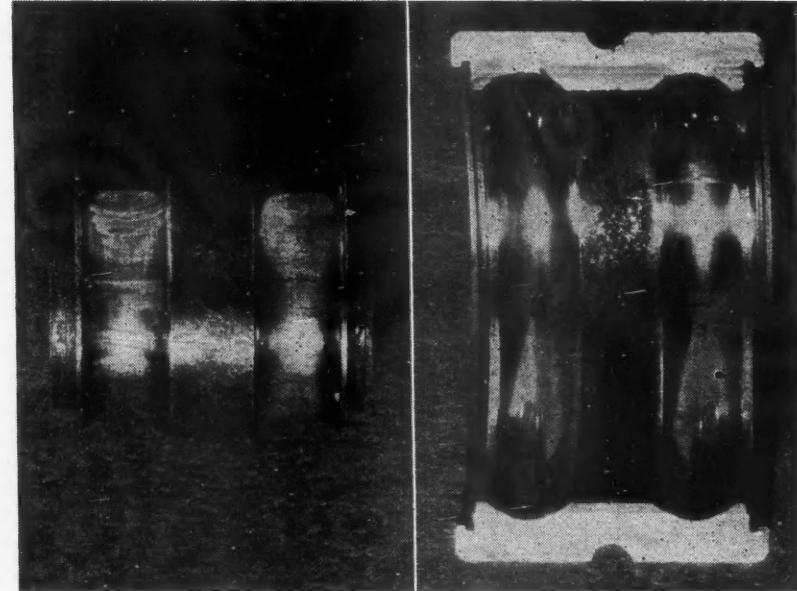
Aircraft-engine rocker shaft bearing that was damaged in service by engine vibration
